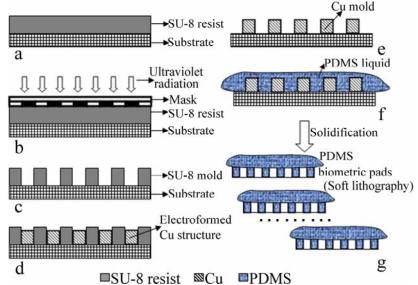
Procedures of fabricating biomimetic wet adhesive pads. (a) SU-8 photoresist casting; (b) UV exposure; (c) bake and development; (d) electroforming; (e) SU-8 mold removal; (f) PDMS casting; (g) soft lithography repeatedly
